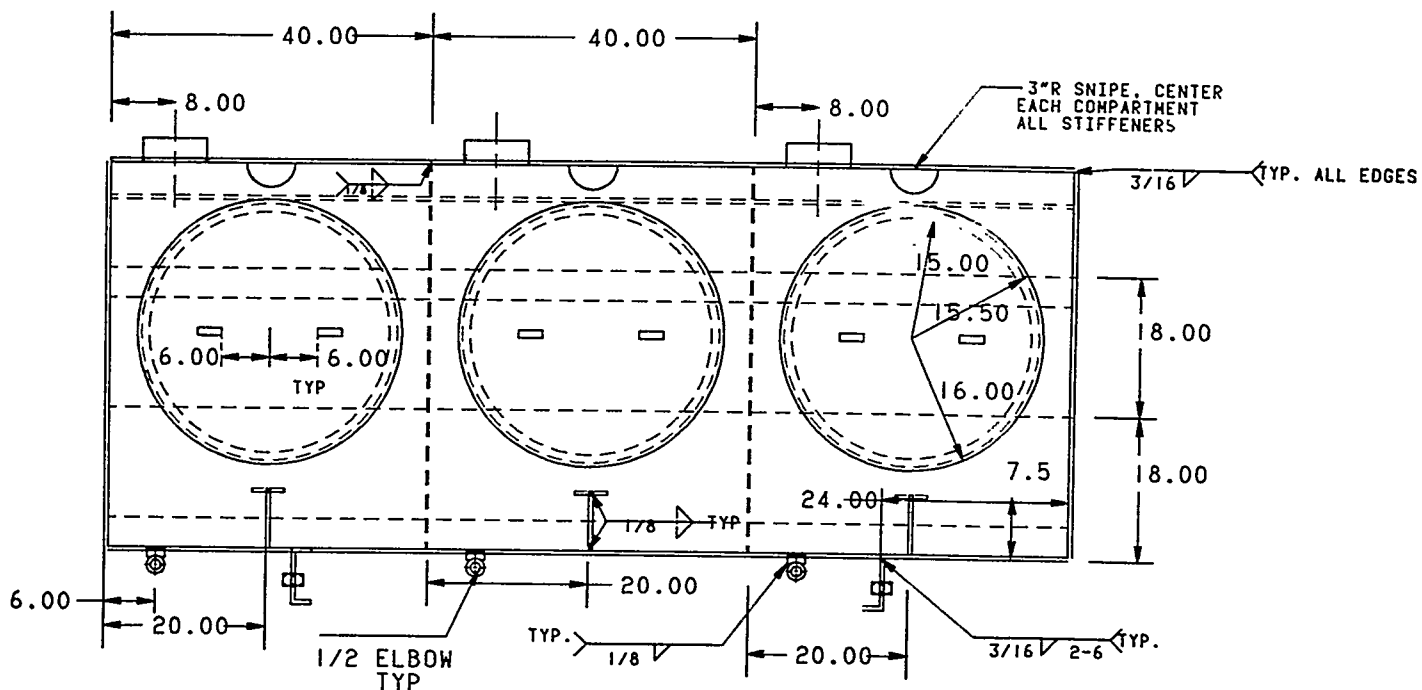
Drawing Showing Details of Test Tank Assembly
